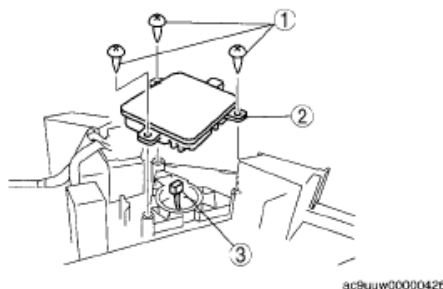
Identifying Discharge Headlight Control Module, Connector & Screws
